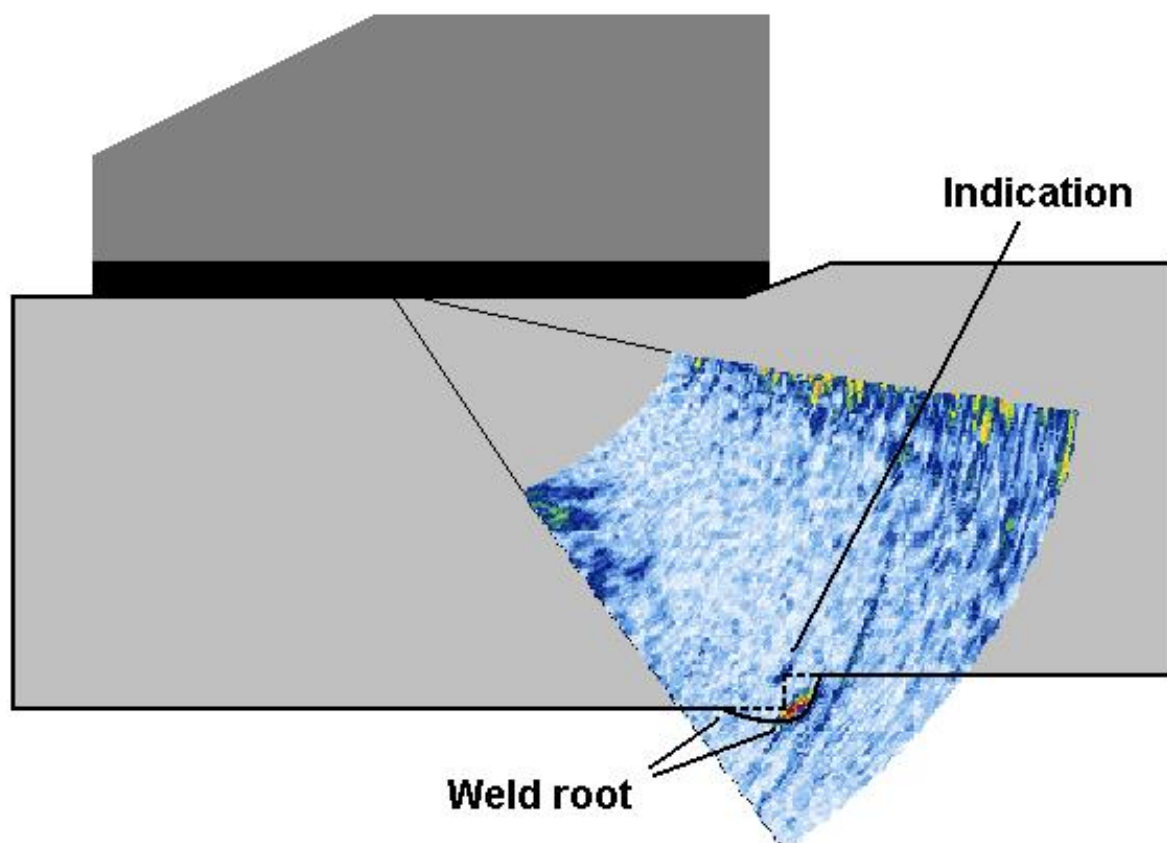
Indication from the step in the internal pipe surfaces in an axially misaligned butt fusion weld.
